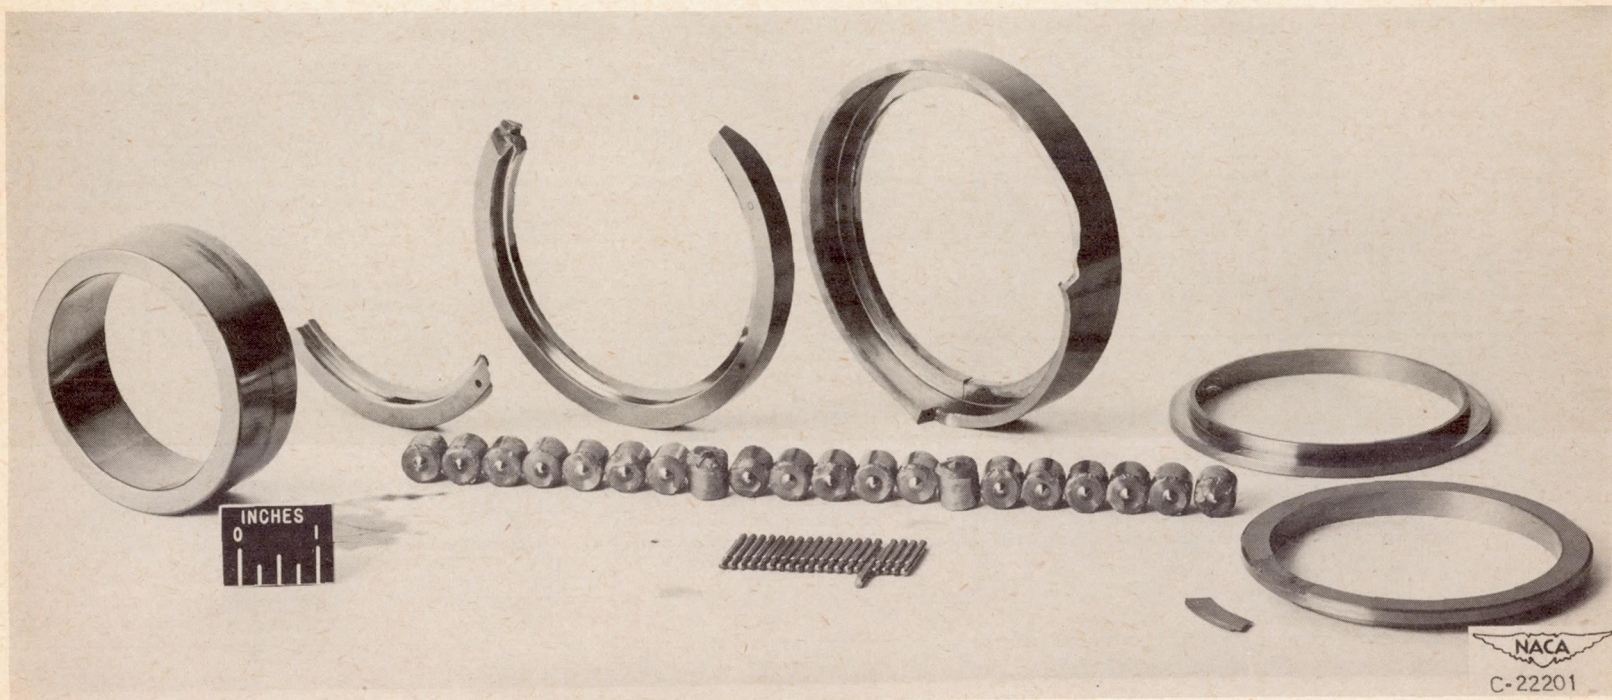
Special tungsten carbide cageless roller bearing after test (bearing 4a).
